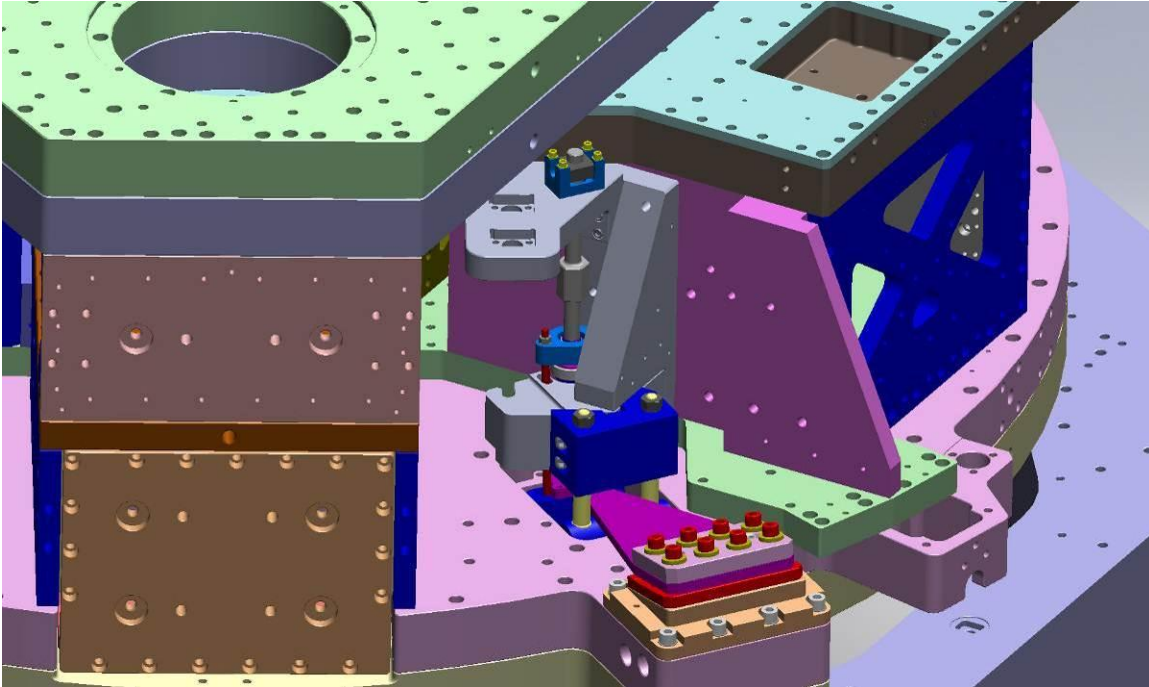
D0902164 Stage 1-2 Safety Mechanism & D0902454 Stage 1-2 Blade Puller Assembly on
